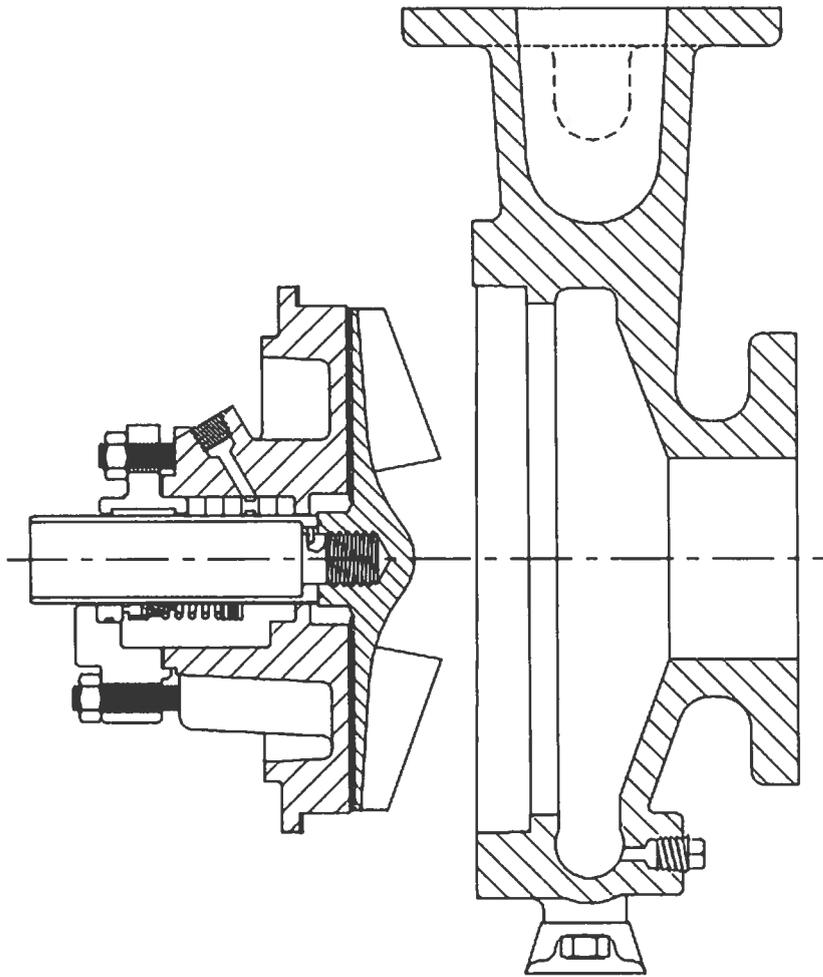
Liquid end (or wet end) assembly
